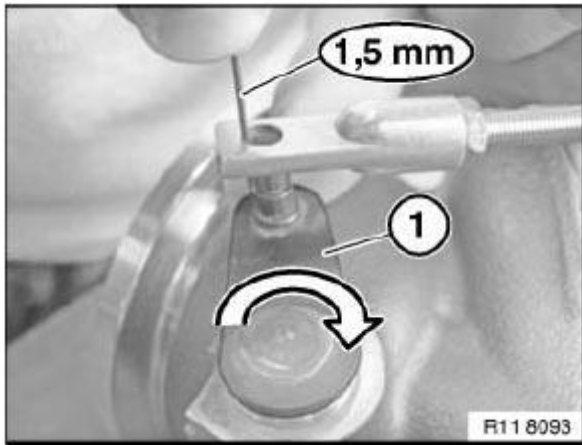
Checking Wastegate Valve Gap Dimension (1 Of 2)
